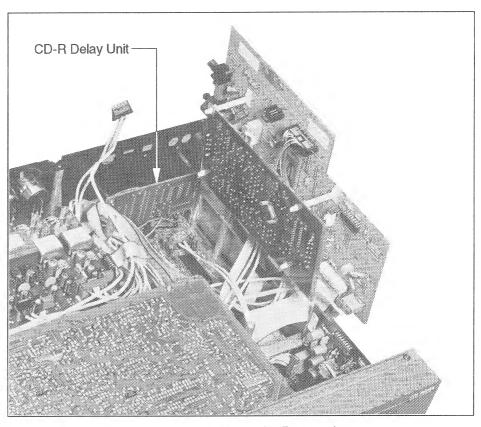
CDR delay unit installed in the D740 CD recorder. Front top view.
